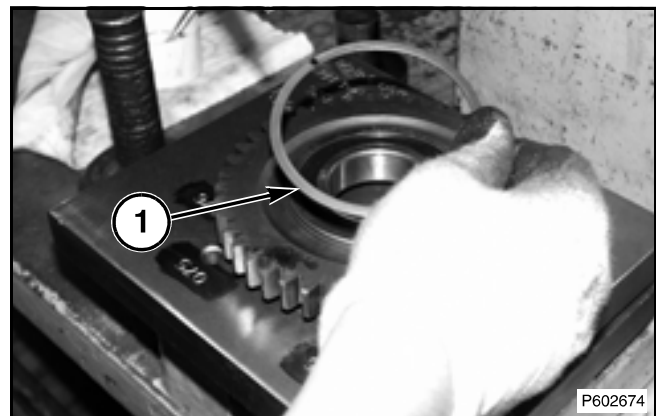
Press against the outside race of the bearing. Press the bearing (1) into the idler gear (2) until the retaining ring that remained on the bearing contacts the idler gear.
